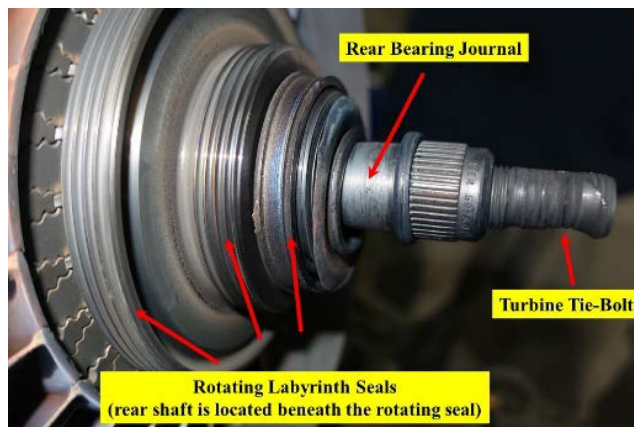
NO. 2 ENGINE TIE-ROD AND SEAL DAMAGE
